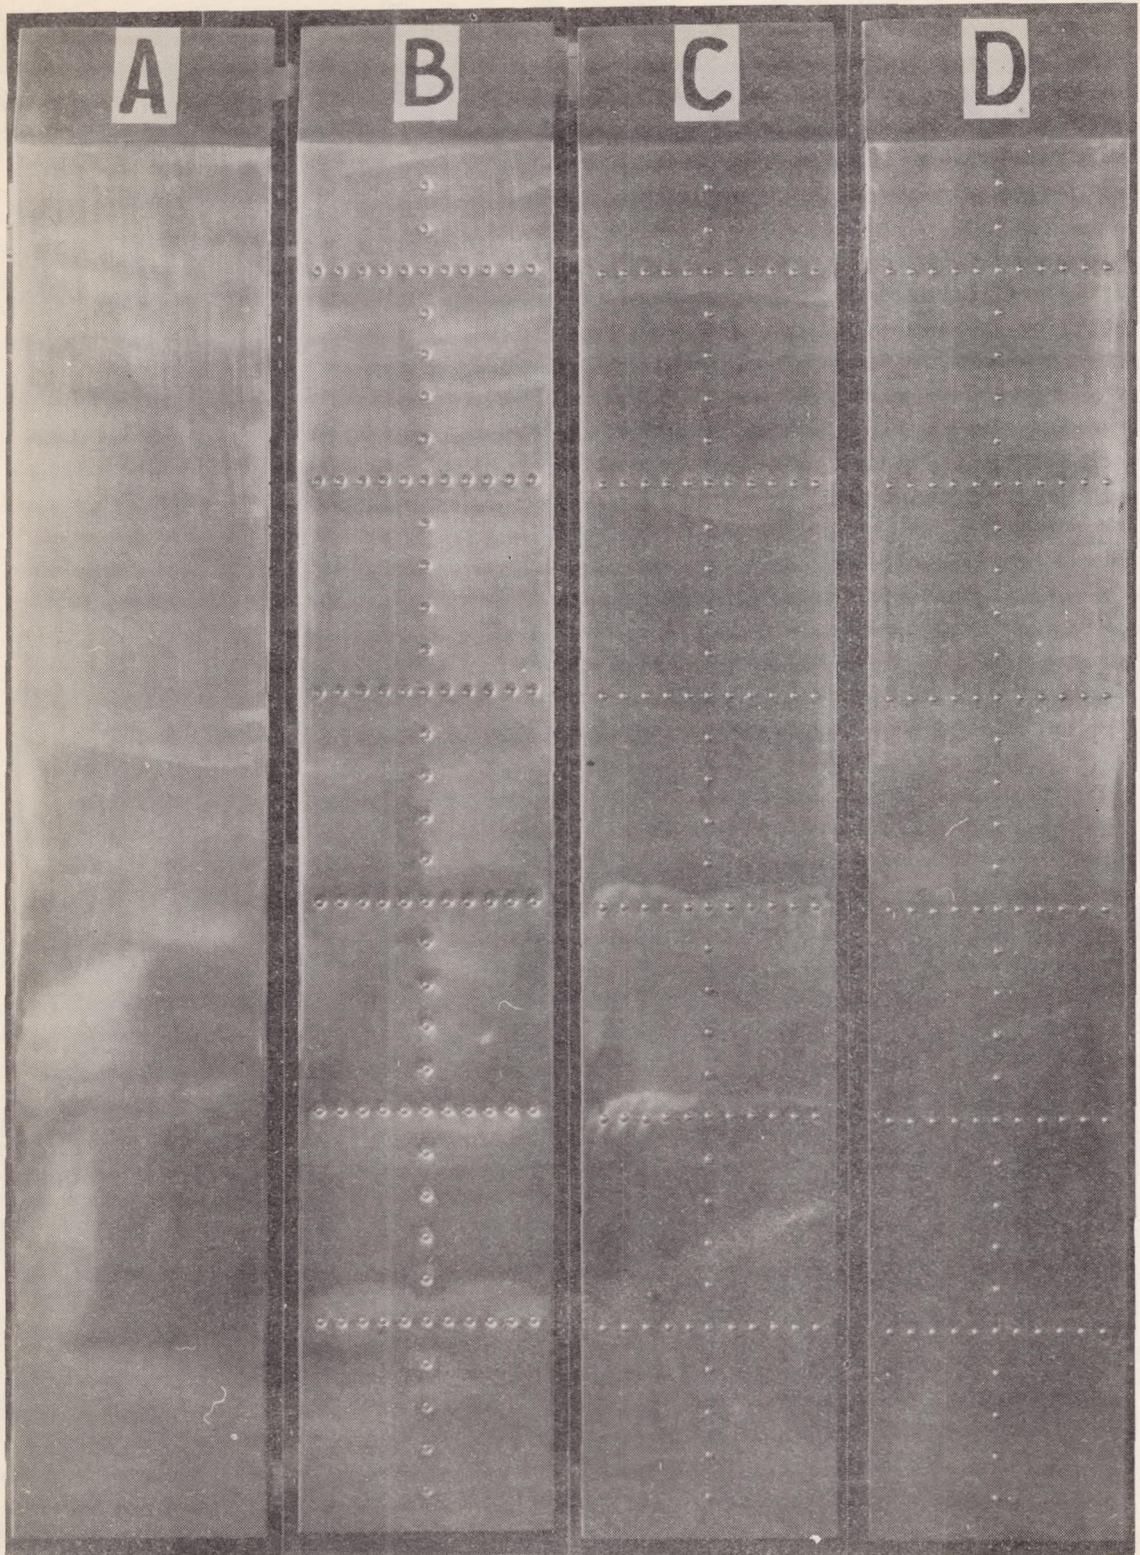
Planing surfaces tested. Surface 56-D assembled with strips and core.
